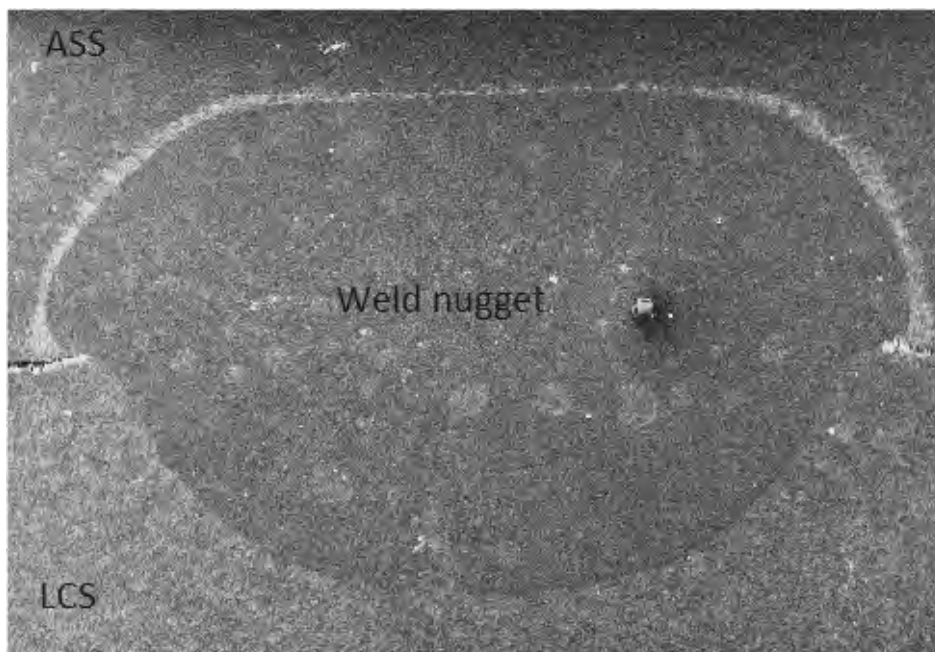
Asymmetrical weld nuggets from dissimilar metal spot welding.
